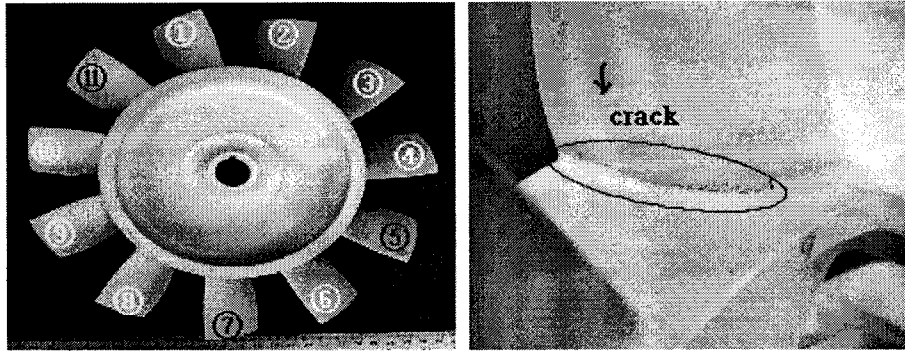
The cracks of oil cooler fan blades (#5,7,11 blade).
